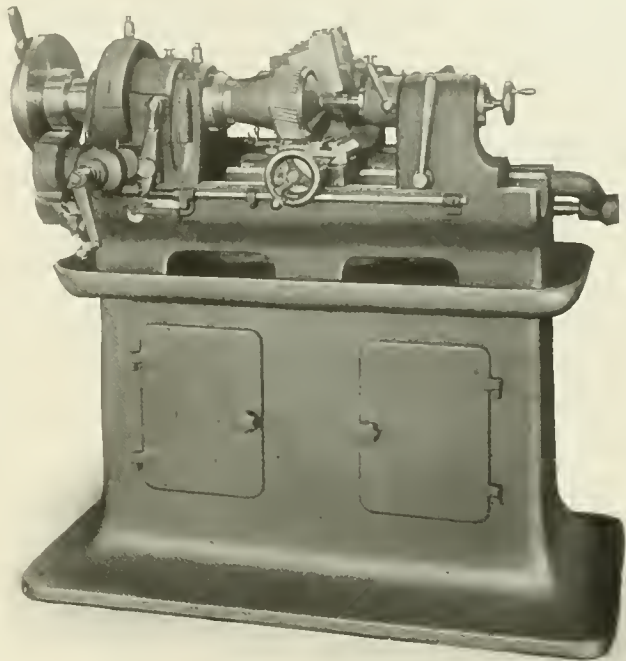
Pratt & Whitney Spiral Gear Milling Machine
